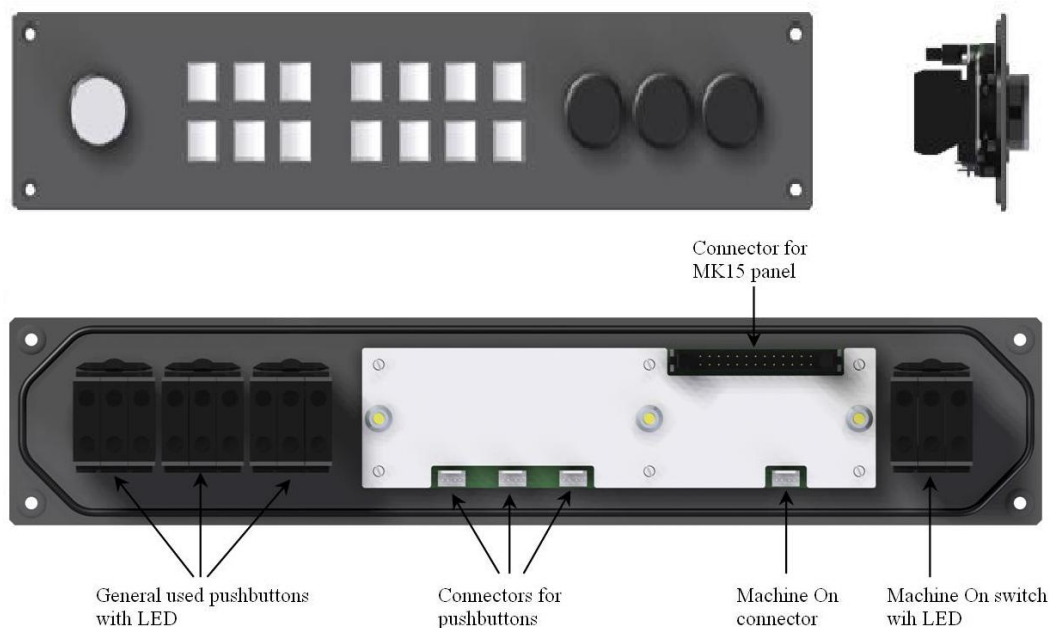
The front board, side view and connector assignment of the MK15OP optional panel
